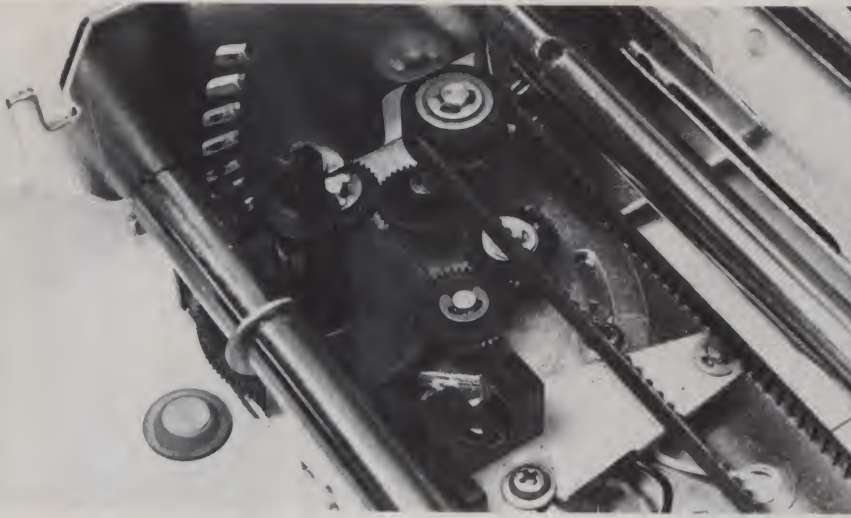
The ribbon drive mechanism is a system of injection molded plastic gears. The head belt supplies power to the gear nearest the belt pulley. This gear flips between the two adjacent gears depending on which way the head is moving. The result is that the ribbon is driven regardless of the direction of head travel. The head home sensor is shown in the foreground of the gears. The ribbon gears and home sensor each have a single factory set adjustment. The prudent owner will not tamper with either setting.
